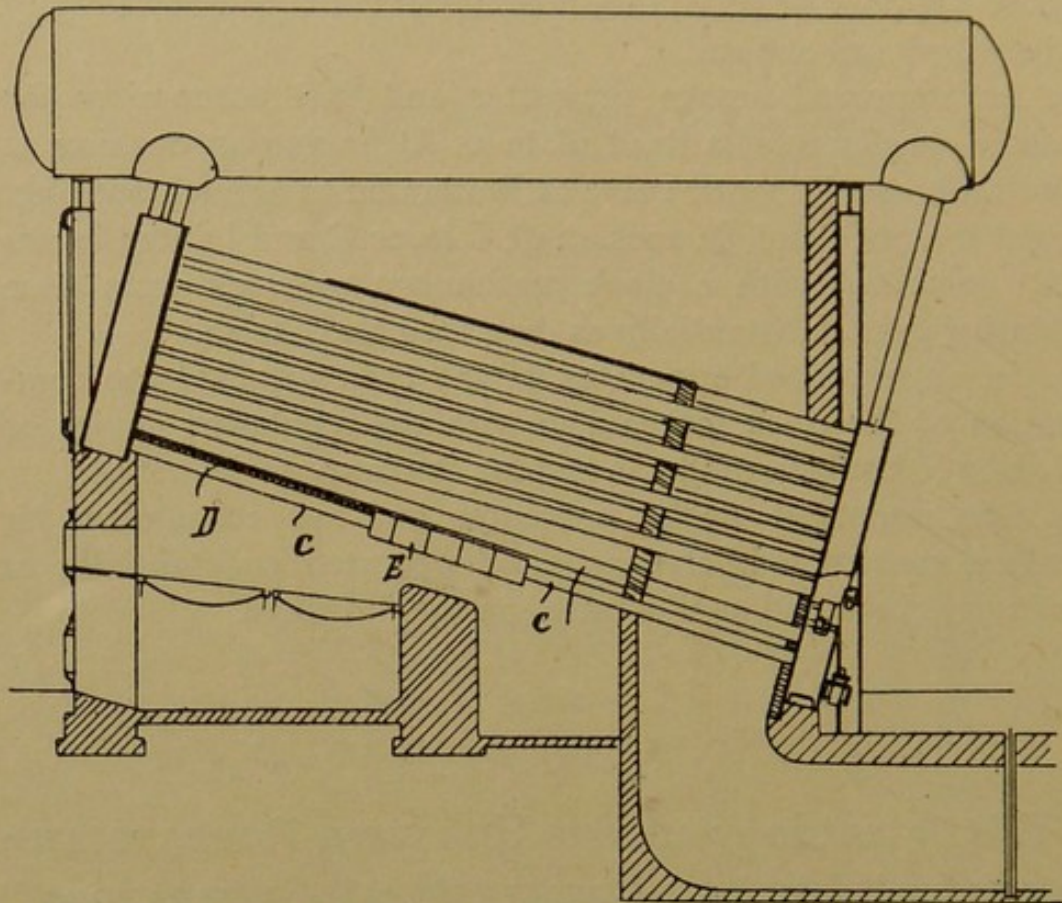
THE HORNSBY IMPROVED SETTING FOR WATER-TUBE BOILERS.
